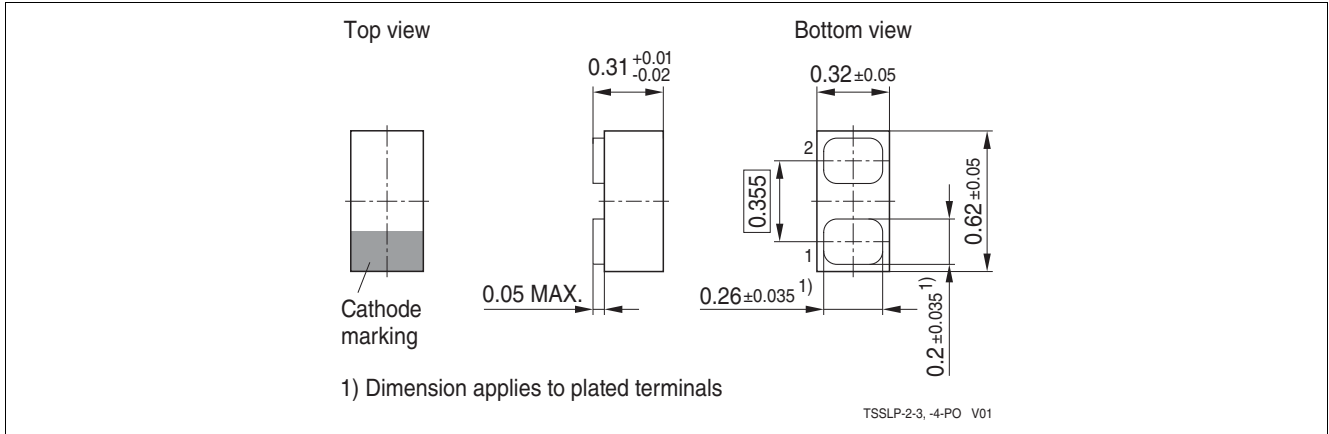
TSSLP-2-3: Package outline(dimension in mm)
